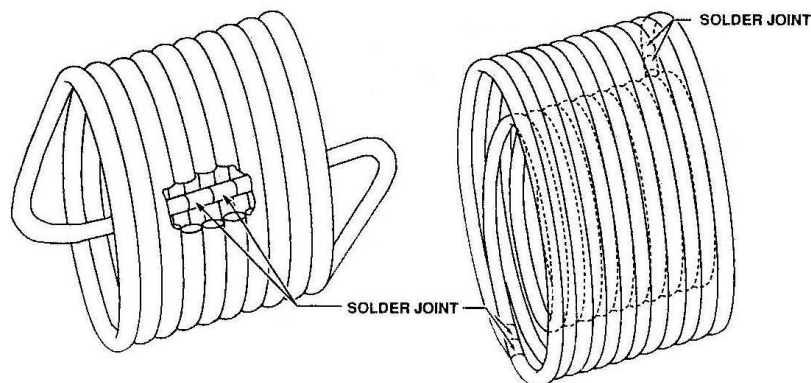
Possible armature coil winding techniques. Showing single layer and multilayer coils on the left and right respectively.
